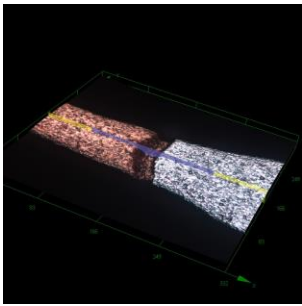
Soldermask interface after mask removal on immersion silver with conventional brush SM pretreatment
